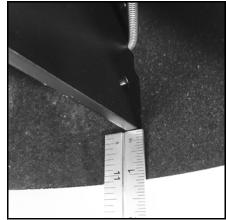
INSTALLED CENTER SHAFT ASSEMBLY
